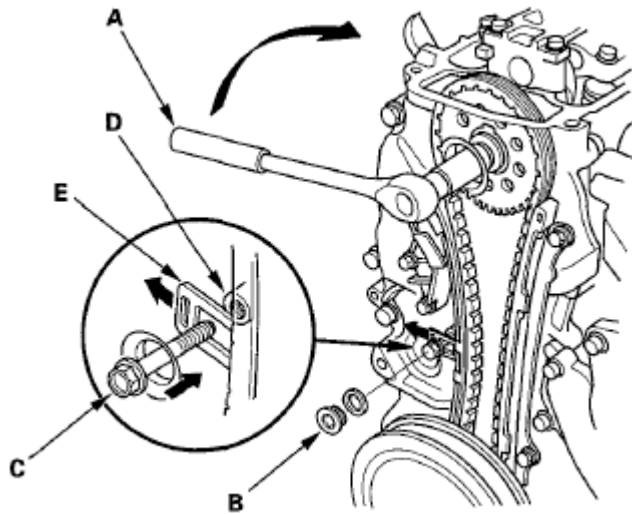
Turning Camshaft Clockwise To Compressing Cam Chain Tensioner
